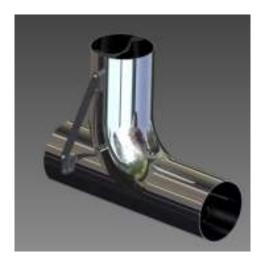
EXHAUST CONTROL VALVE - FINAL
